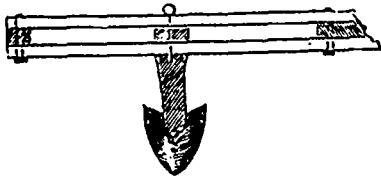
MOVABLE TOOTH OF LAND MARKER.
